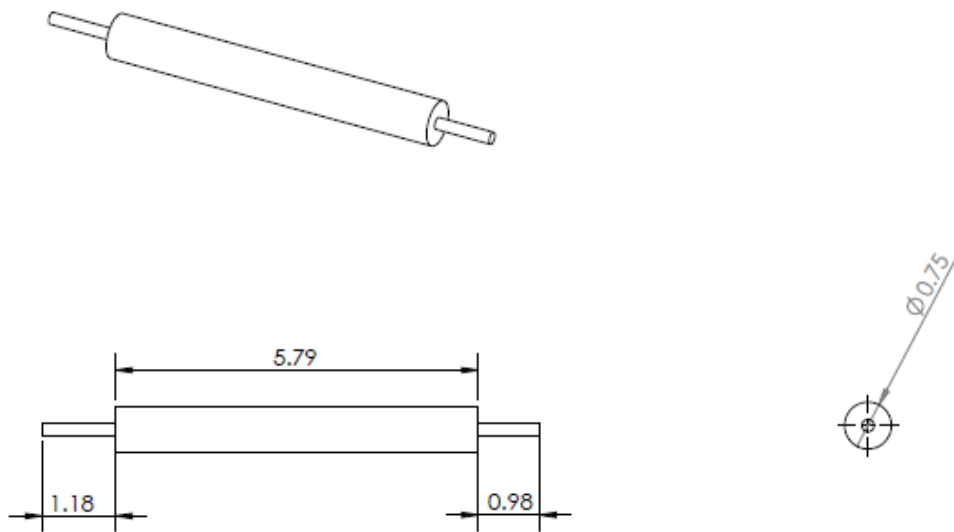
Figure J. The mirror-like steel rod machined to be used as a spreading tool.
